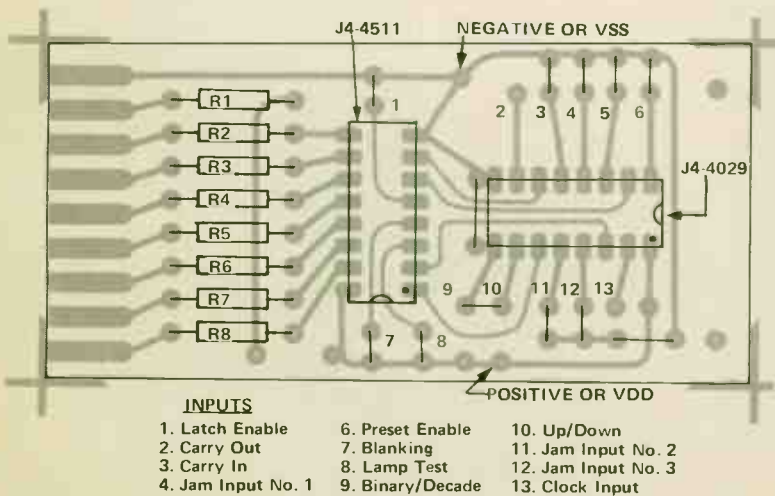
shows the component placement for the counter board. All jumpers and resistors should be installed prior to installing IC's. It would be advisable to use sockets for the IC's although it isn't mandatory. Be sure to follow C-MOS handling instructions when attaching IC's to the printed circuit board.
